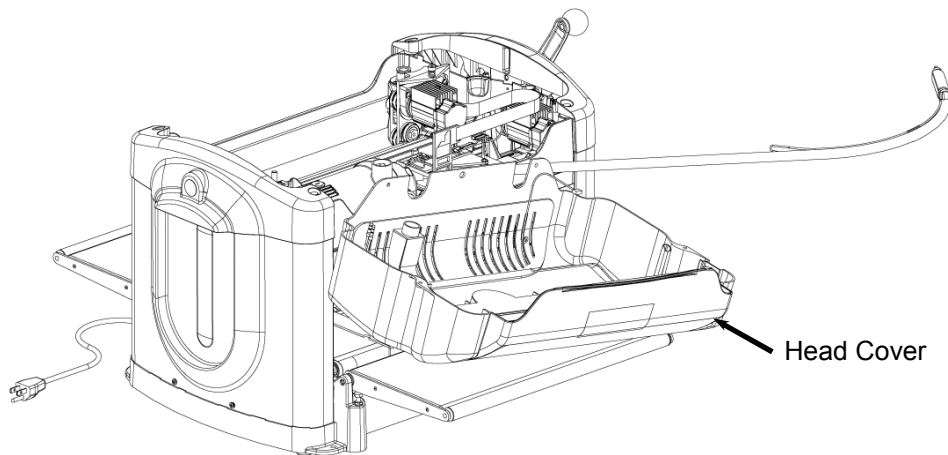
EXPLODED VIEW OF THE REMOVED COVER
